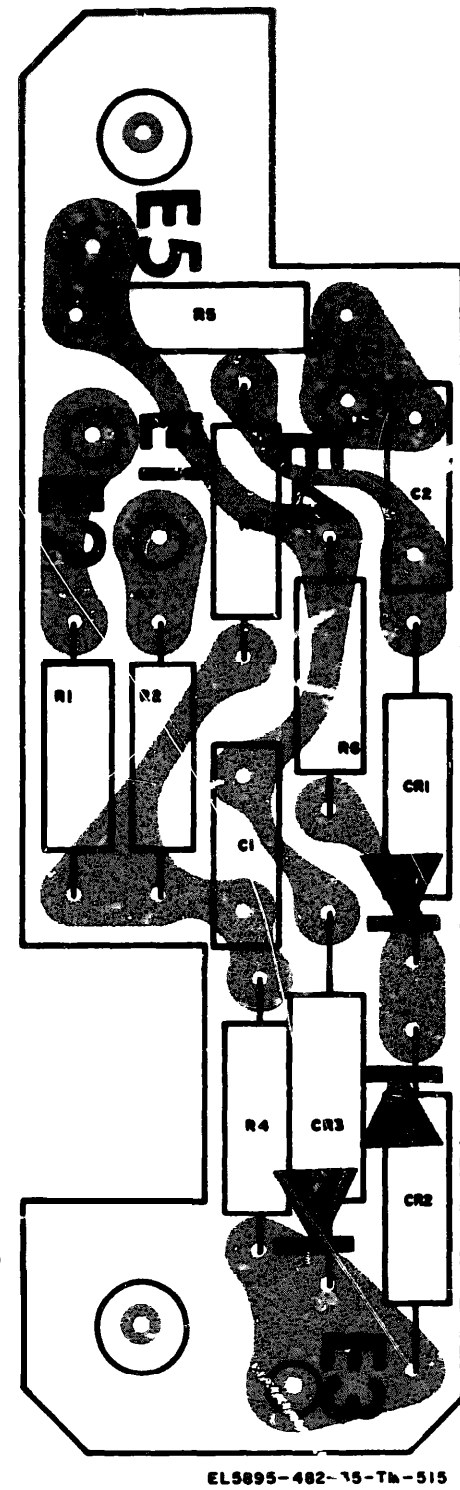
Diode switch A17A1. wiring diagram and parts location
